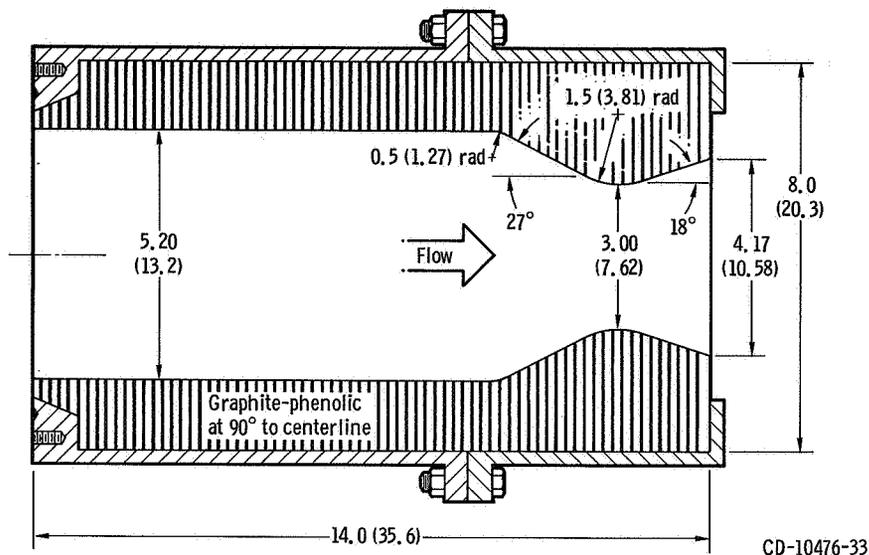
Ablative engine. Throat diameter, 3.0 inches (7.62 cm). (All linear dimensions are in inches (cm).)
